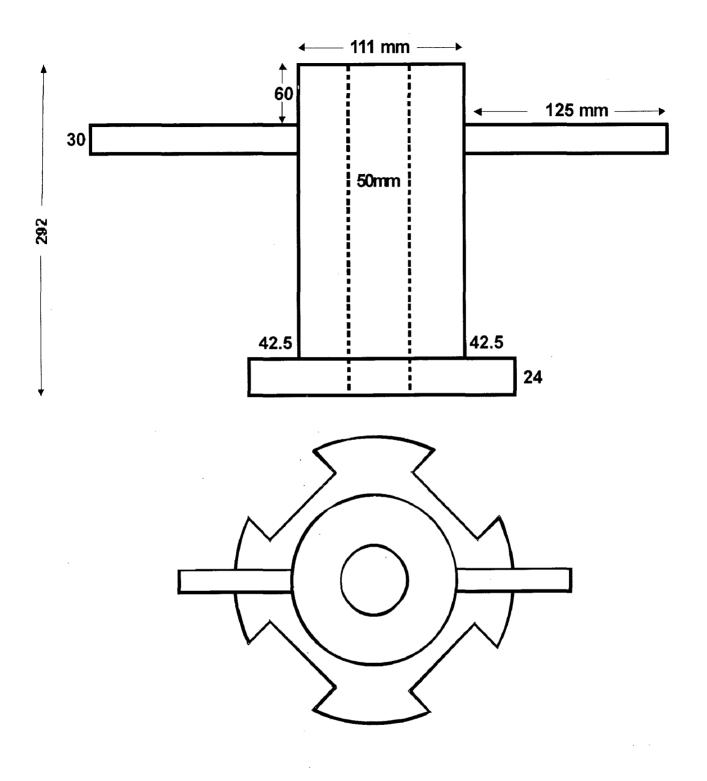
Details of Cylinder Assembly (dimensions in mm)
